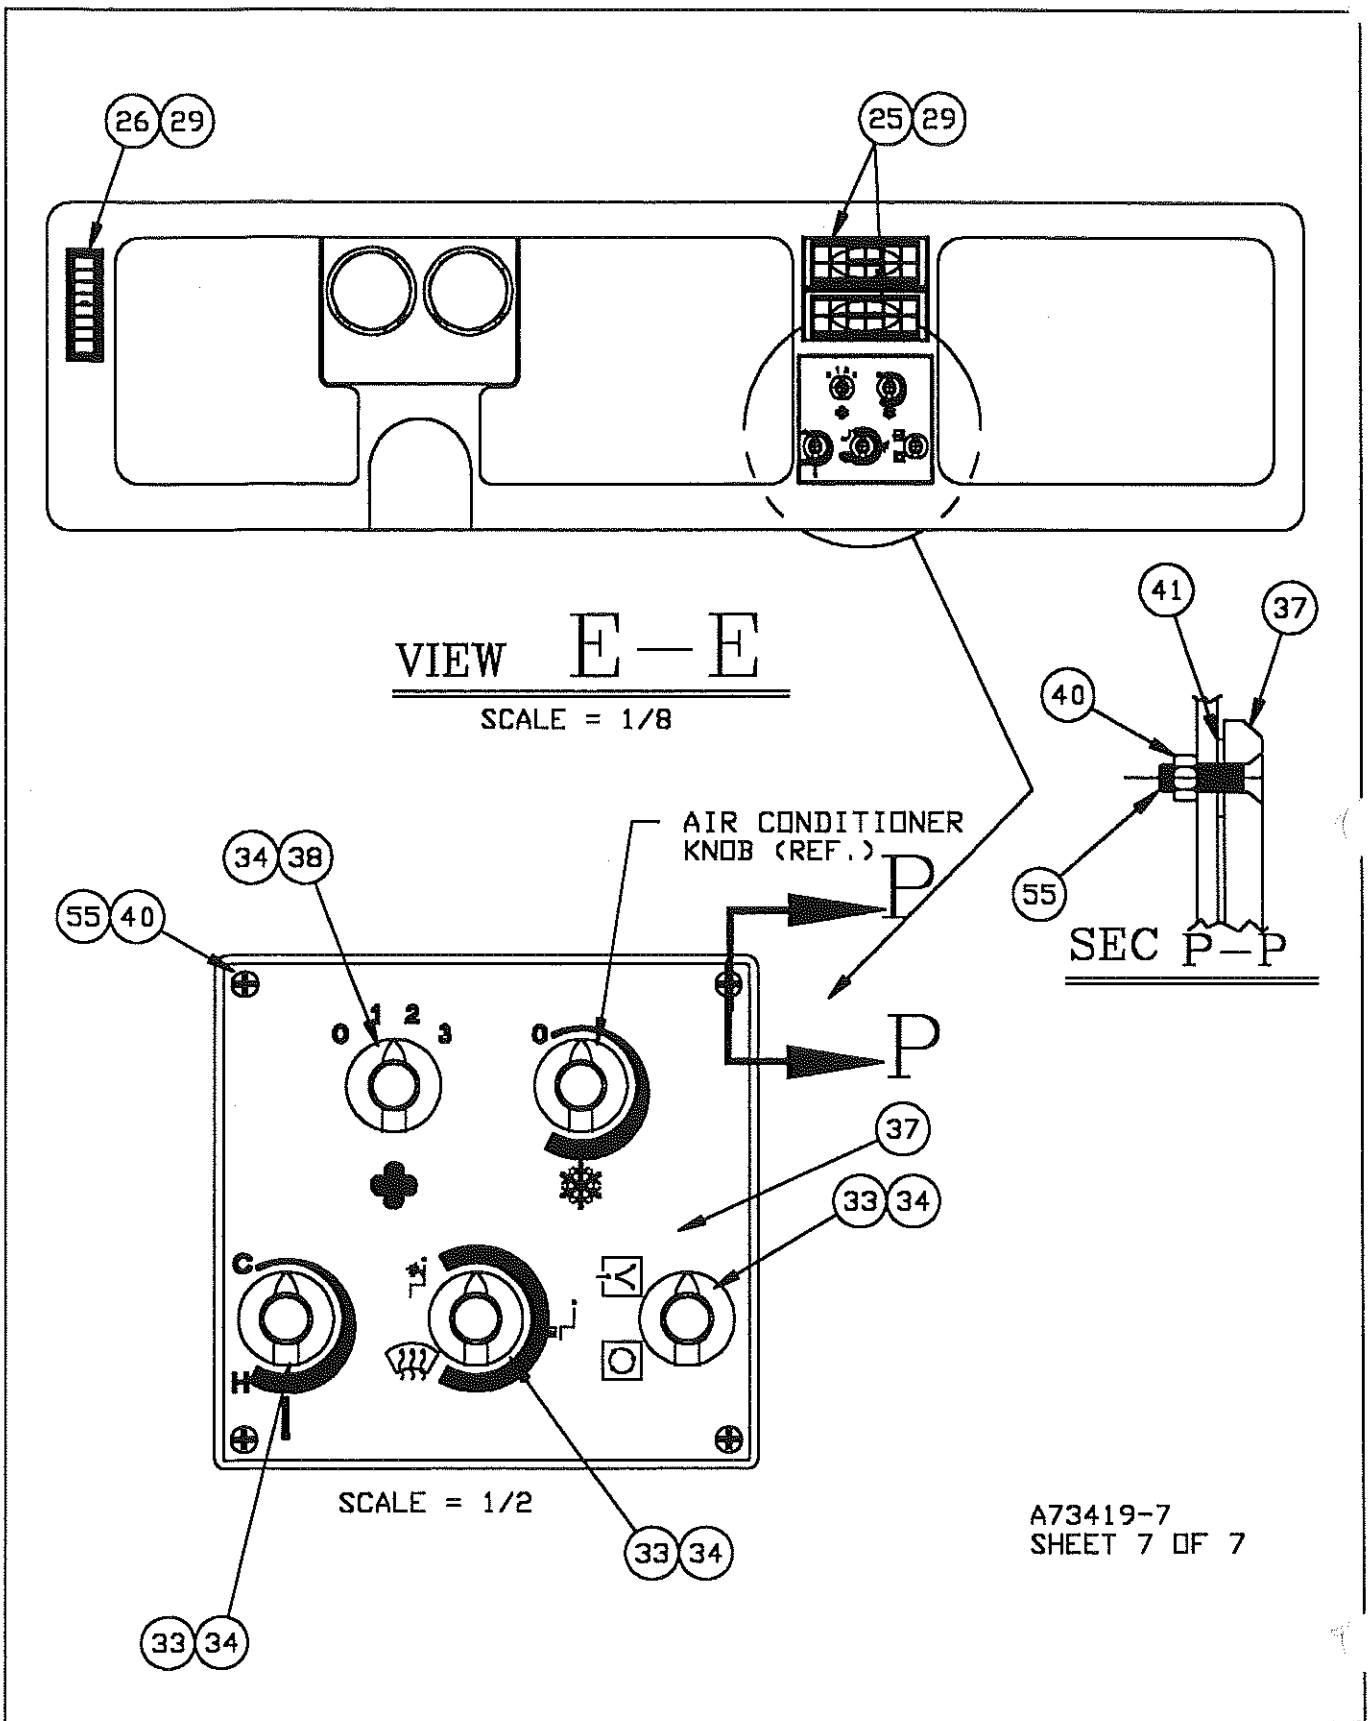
CAB HEATER ASSEMBLY - SHEET 7 OF 7
